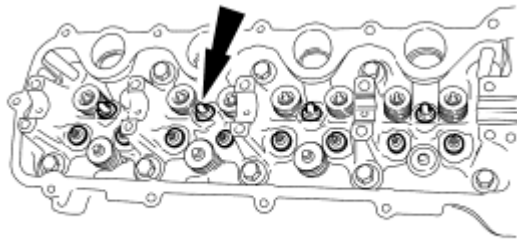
Identifying Cylinder Head Remover/Installer (303-572)
